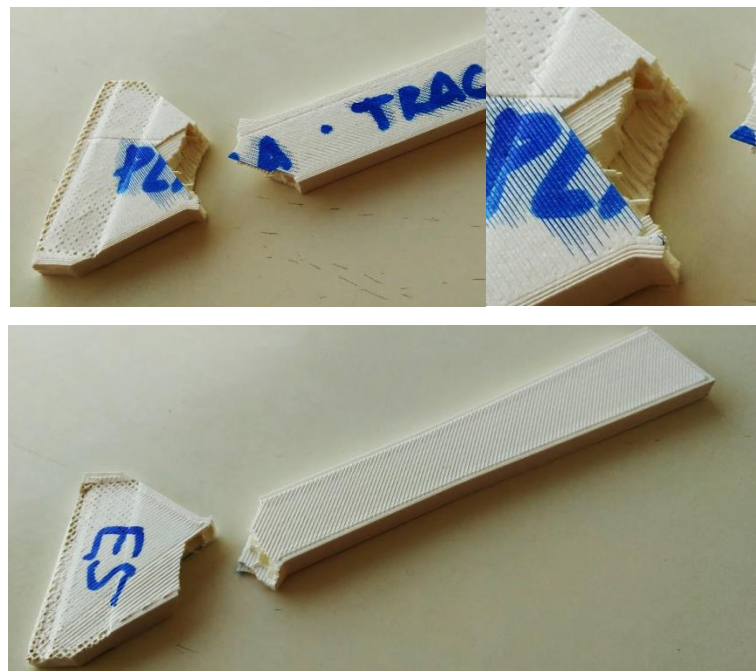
Part displaying fracture after compression stress test – strains perpendicular to force: a (upper left) a typical fracture with “slippery” layers, b (upper right) close-up of fracture showing shell layers and infill; c (bottom right) typical fracture location and morphology.
